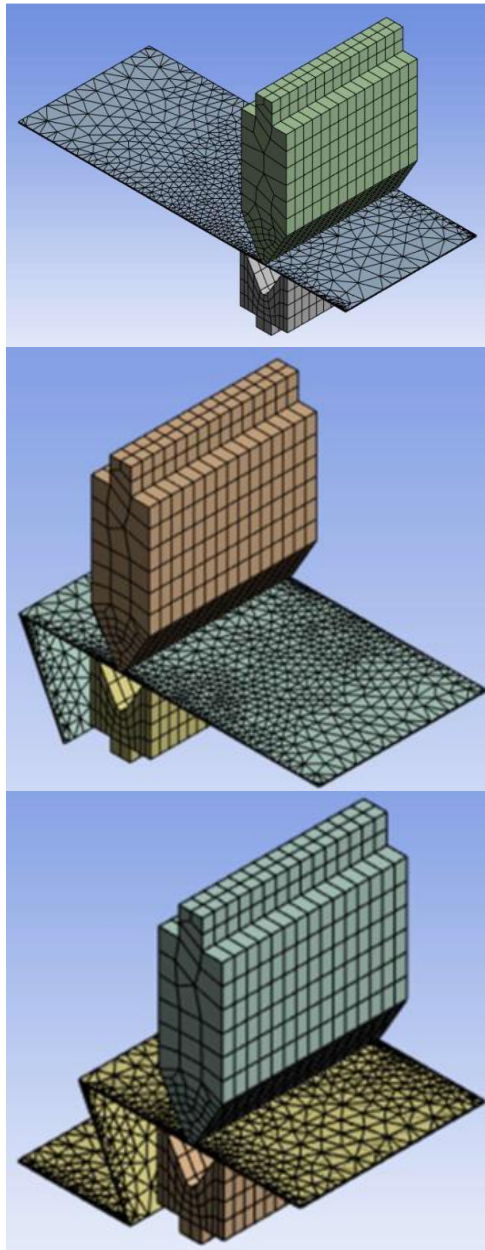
Finished mesh for punch, die and sheet assembly for three bends
